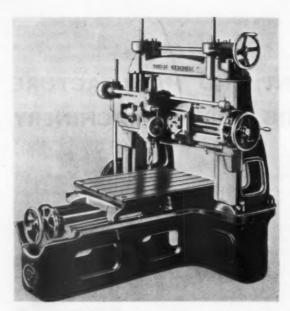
Prototype bridge type jig boring machine made in 1920.
